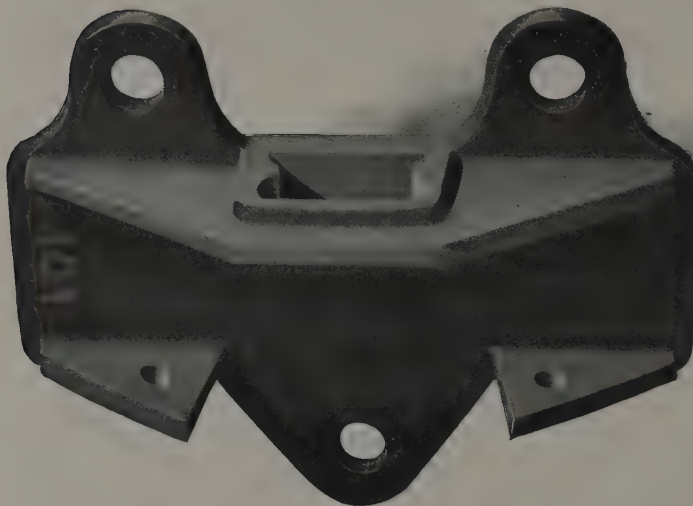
Rocker Carrier and Rocker for Universal Rocker Side Bearing.
